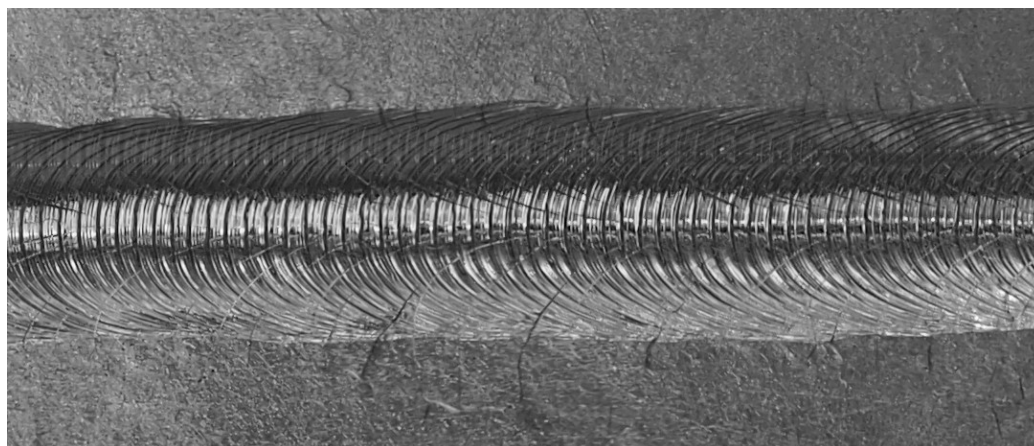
Boroscope image of the inner weld seam from the test weld section of the full penetration welds on the cavity.
